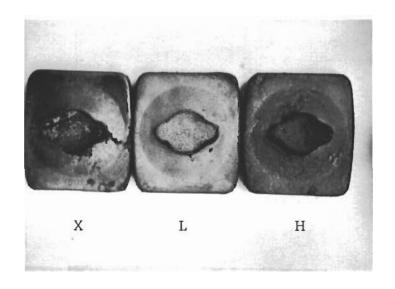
Top and Bottom of Three Representative Castings from Glazed Mold
